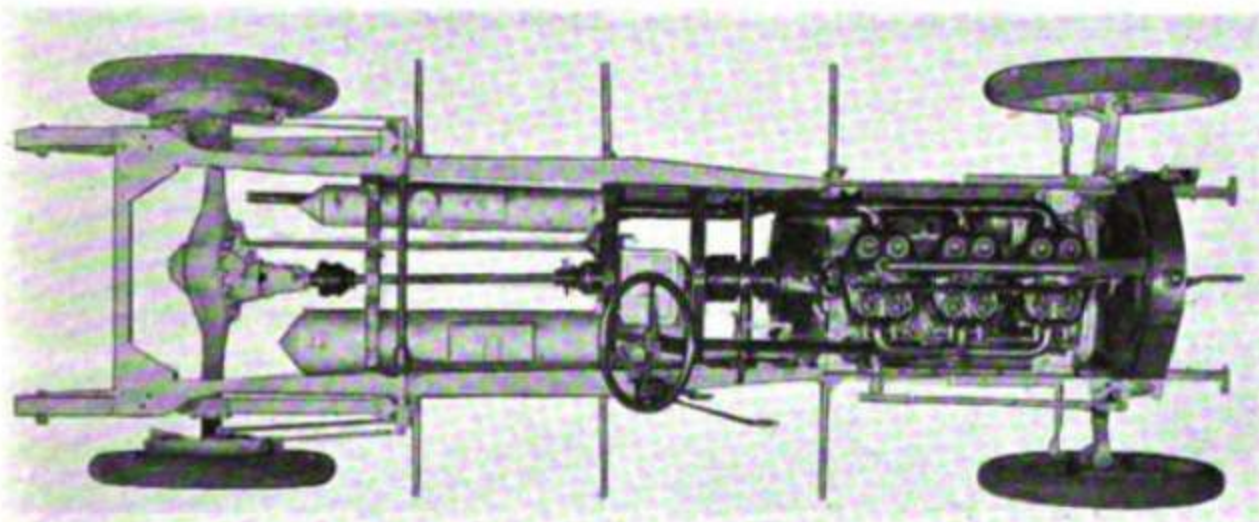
Top view of Thomas chassis, showing fuel tanks, feed being by air pressure. The transmission gear set is located just aft of the clutch, the propeller shaft being universal jointed.
